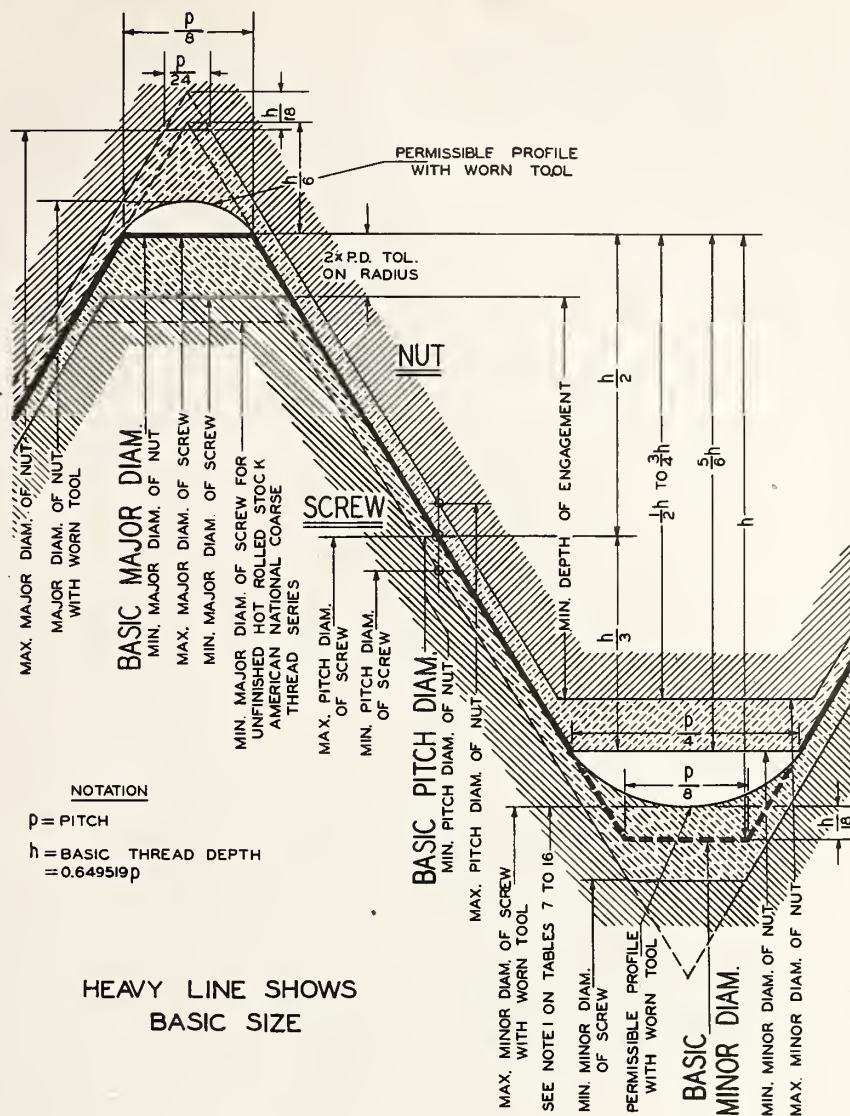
Illustration of tolerances and crest clearances for class 2 fit.
